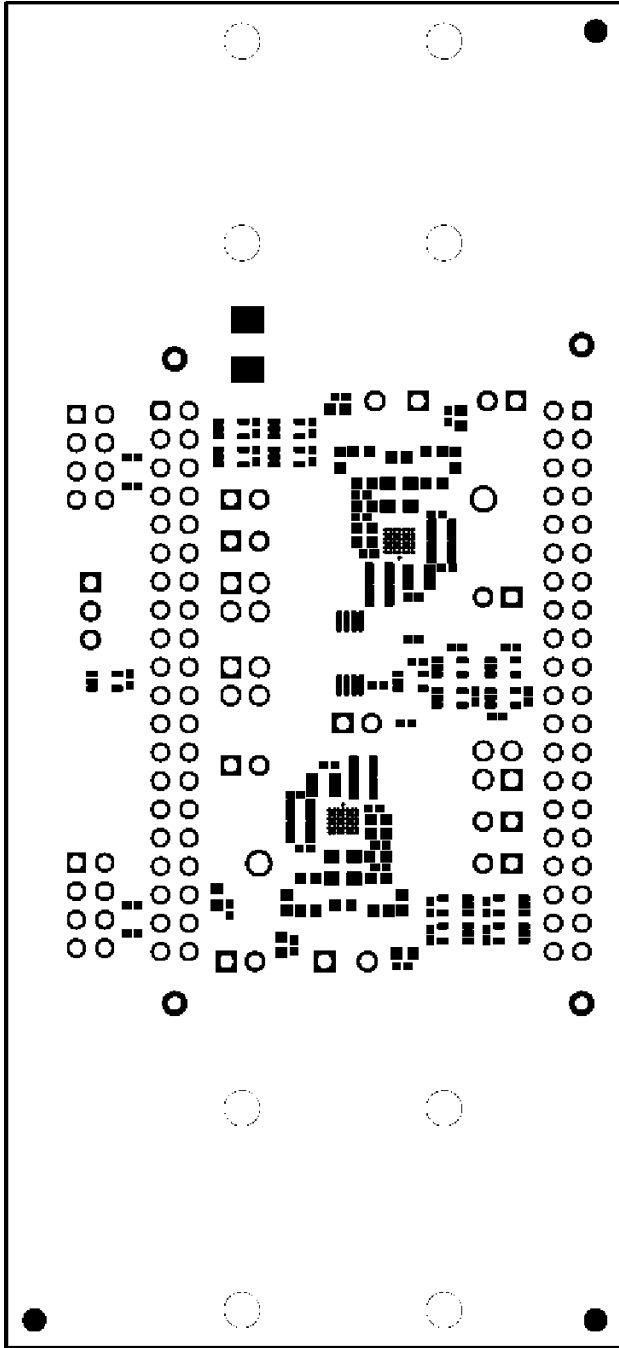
TAS2563YBGEVM-DC Top Solder Mask
